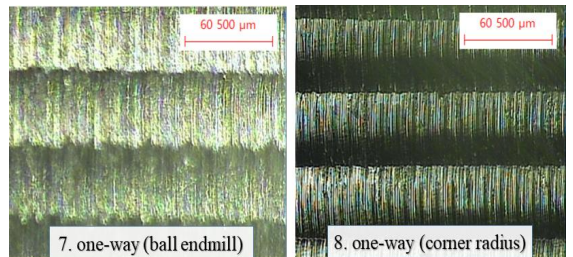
Microscopic views of the surfaces in 5-axis machining
